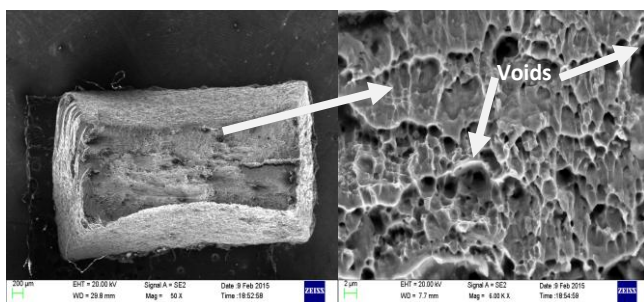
ASTM E8 standard tensile coupon of GTA welded dissimilar metals
